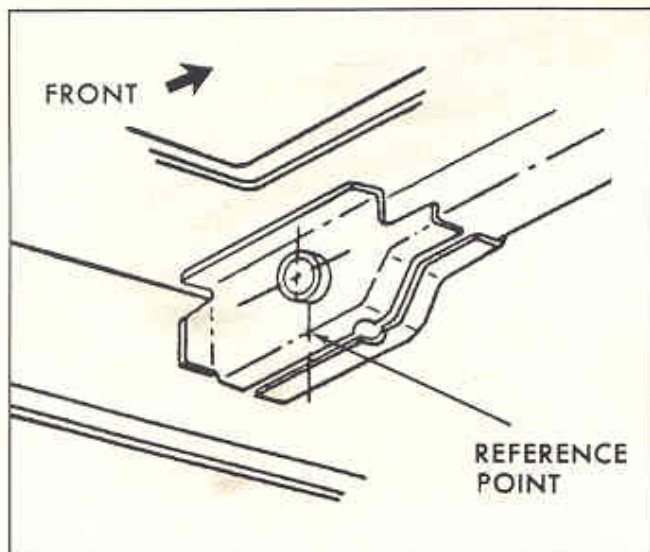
Side Rail at Spring Rear Shackle Hole
